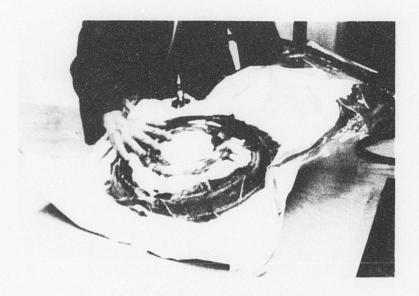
Bagged Wheel-Shaped Bearing Support After Removal From Autoclave Cure.
